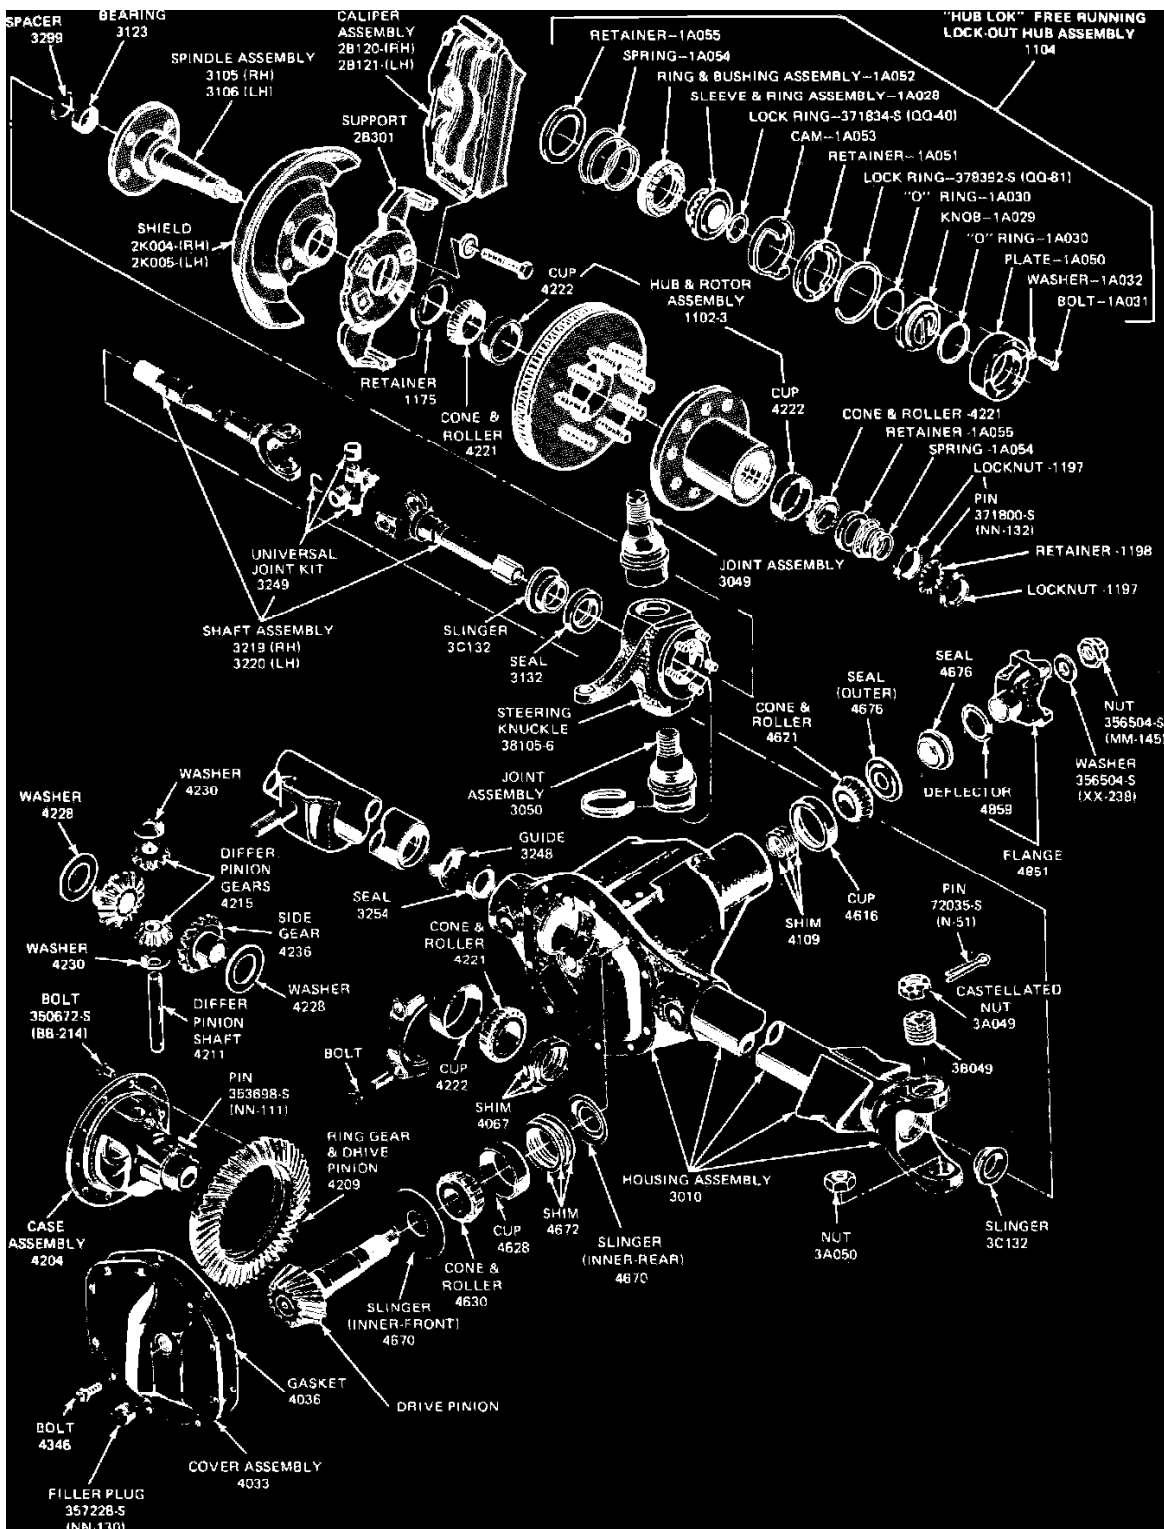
Disassembled view of Dana/Spicer model 44-9F front drive axle
